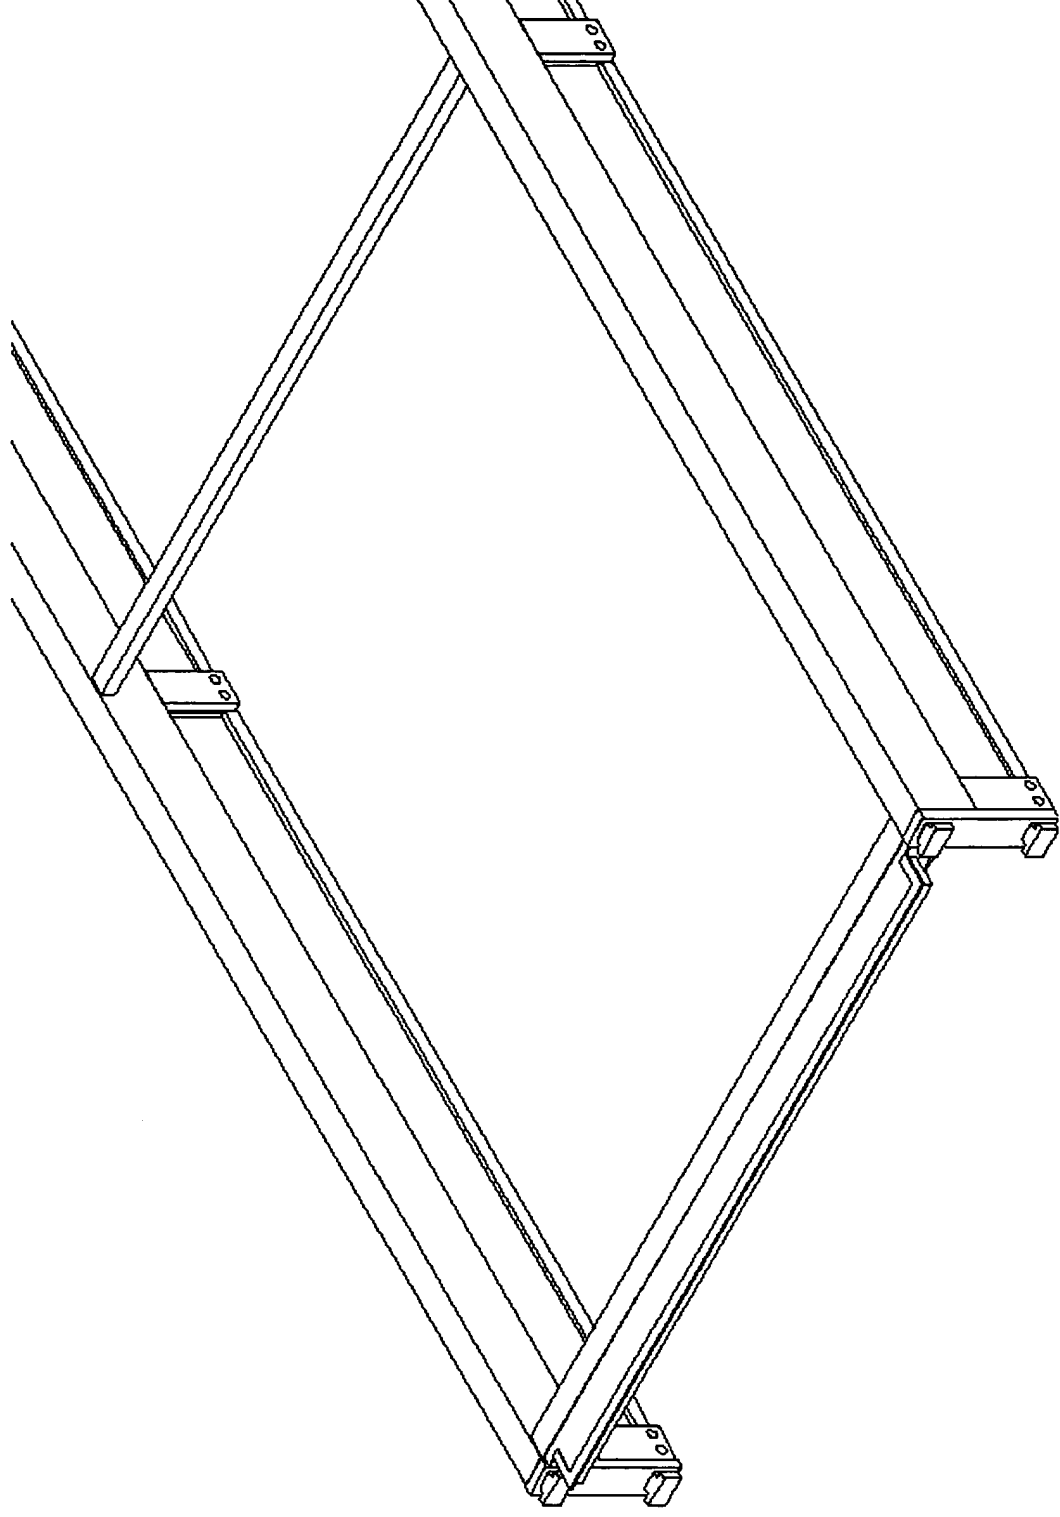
D: Isometric view of the right end of a ceiling frame (20 foot high cube collapsible cargo container)
